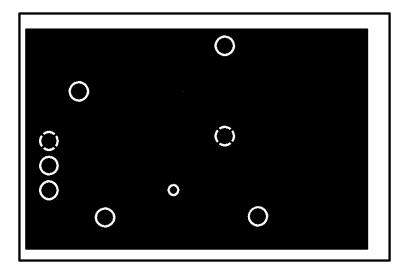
SP6691EB PC LAYOUT BOTTOM SIDE
